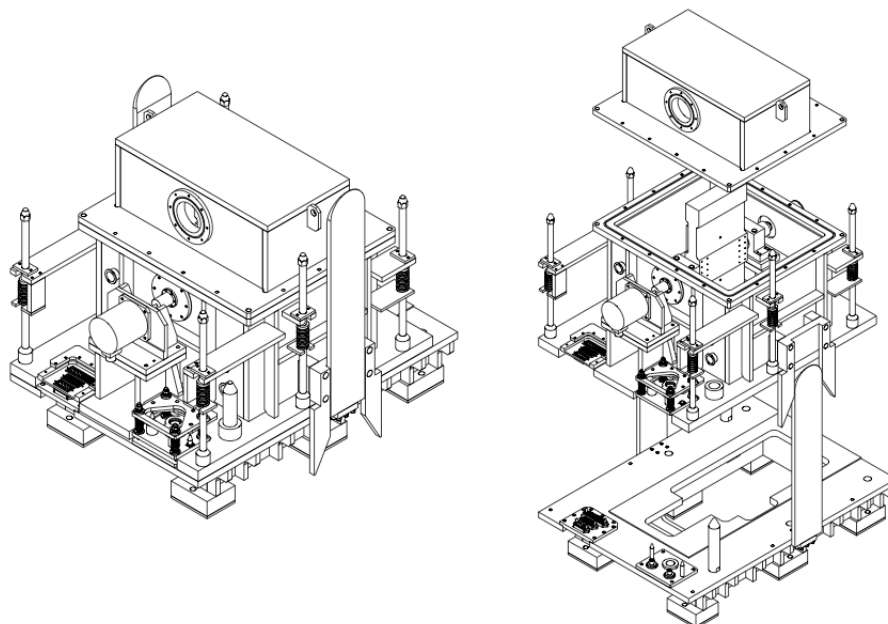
The T0 chopper mounting the semi-auto installation mechanism. In the right figure, the upper part of the vacuum chamber is removed to show the rotor. Normally, the upper part is fixed at the body.
